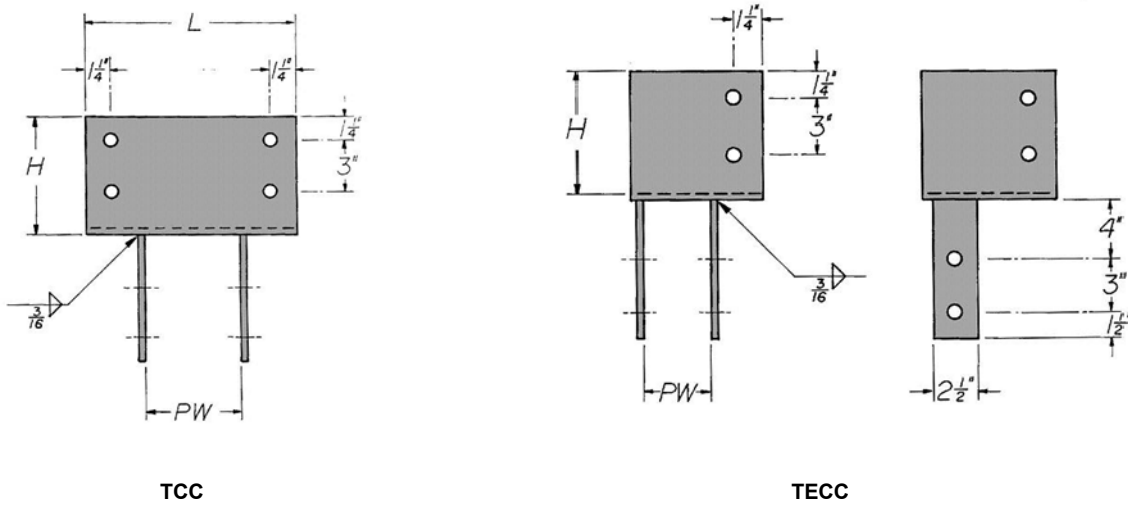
TYPICAL TCC and TECC COLUMN CAP CONNECTORS WITH DEFINITIONS OF NOMENCLATURE L, PW, AND H (See Table 2, previous page)
